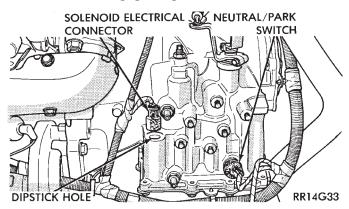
Torque Converter Clutch Solenoid Wiring Connector
